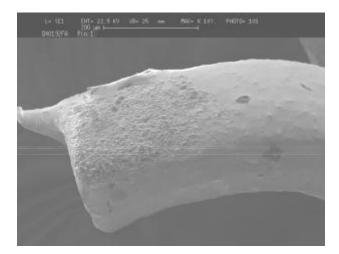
Several of the pins on one side of the package, such as Pin 1 shown above, had questionable contact surfaces—with neither clear evidence of melting from de-solder, nor evidence of fracture. Three pins on this side, Pins 3, 5 and 7, were reported as disconnected when the part was removed. Pin 13 was reported as disconnected on the other side of the package.
